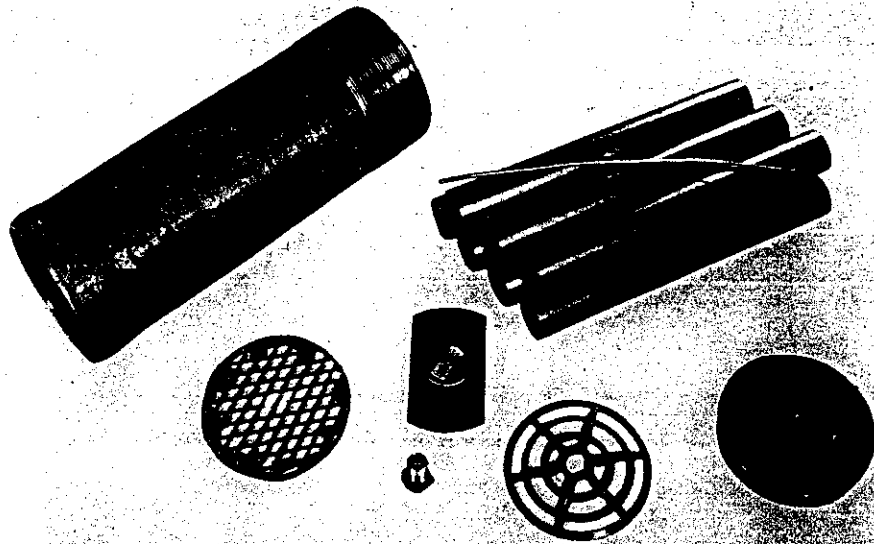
Component parts of 30-cm rocket motor (left to right, top): motor tube, quickmatch train resting on pile of propellant sticks; (bottom): forward grid, ignition charge container with electrical primer below, rear grid, and base plate.
